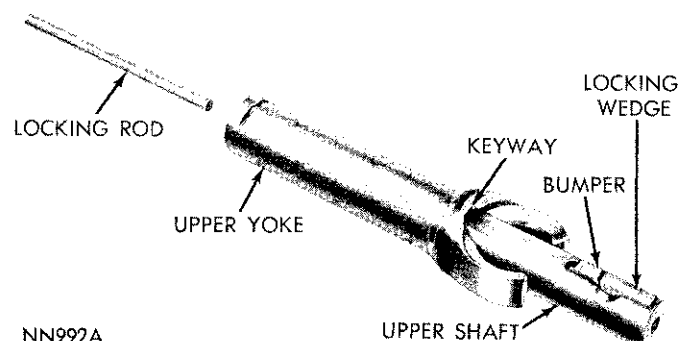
Upper Steering Shaft and Yoke—Disassembled
